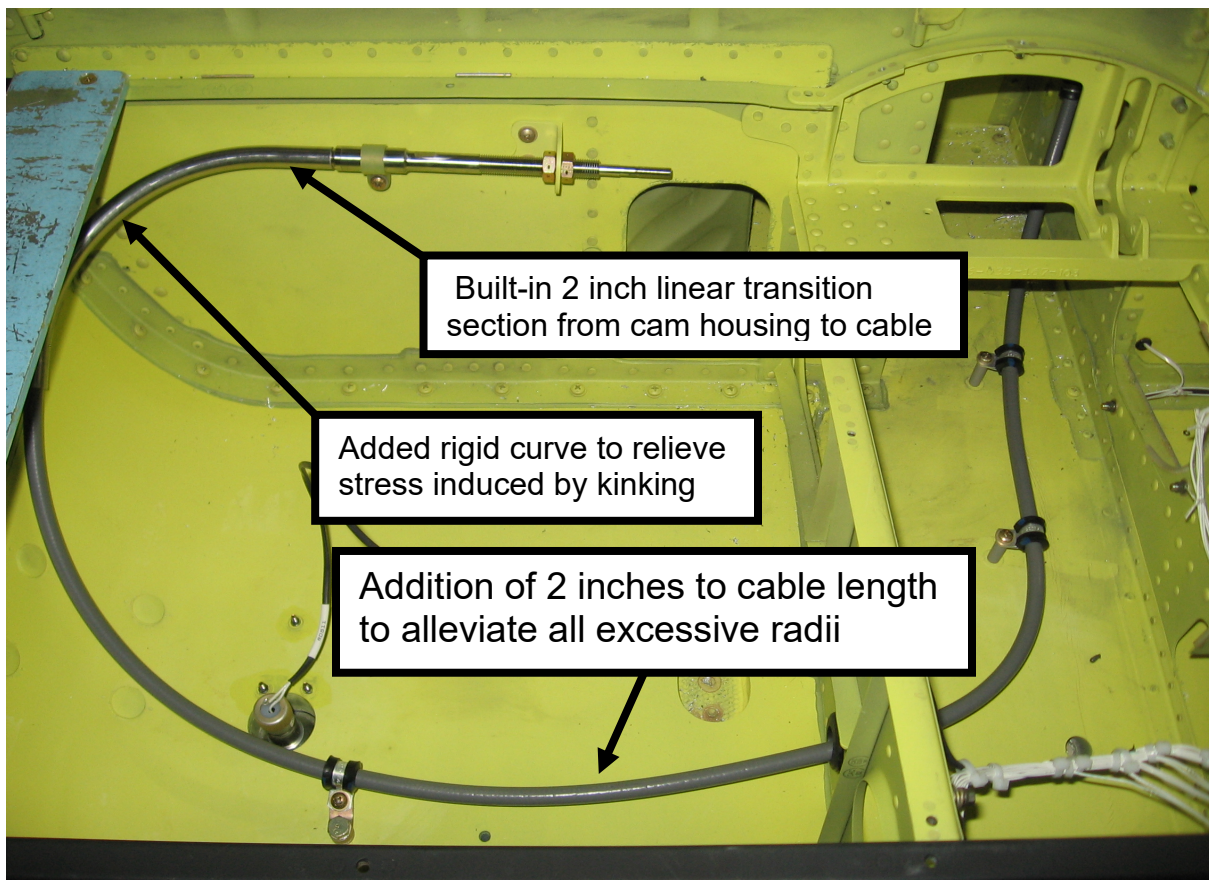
Throttle Cable Assembly 1608750-001 Design Improvements (206L4 Installation Shown as Reference)
